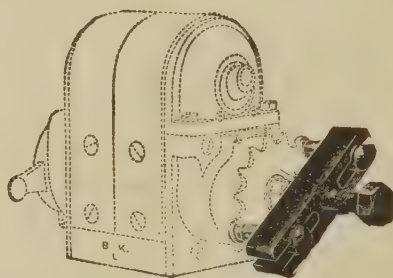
Showing a Useful Tool for Withdrawing a Magneto Chain Sprocket.
